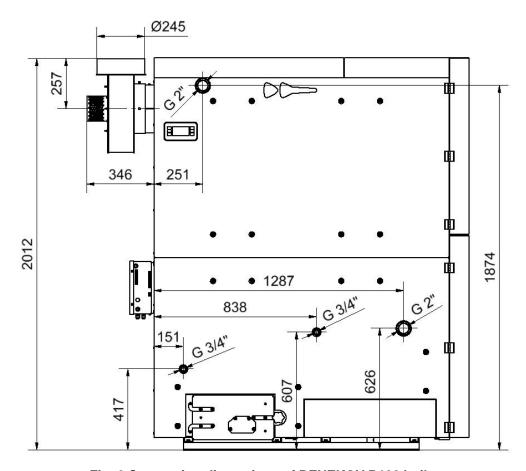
Connecting dimensions of BENEKOV R100 boiler
